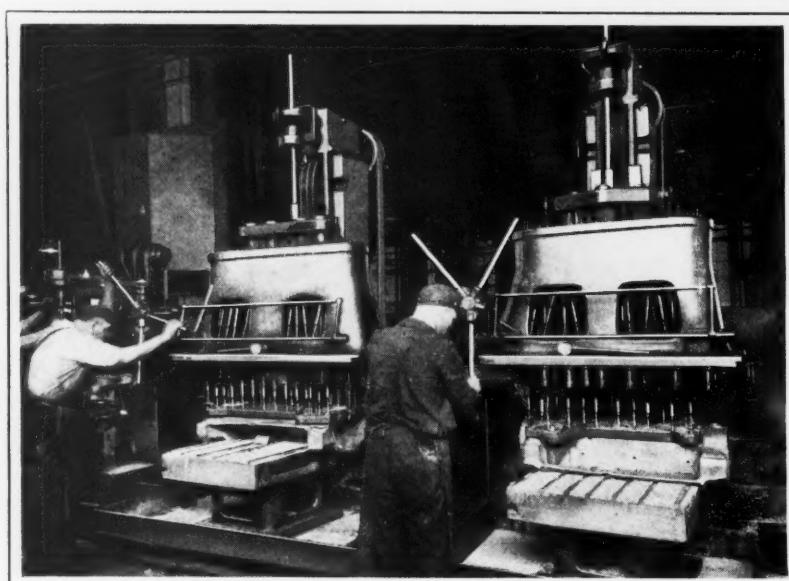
Drilling the Upper and Lower Halves of Crankcases
